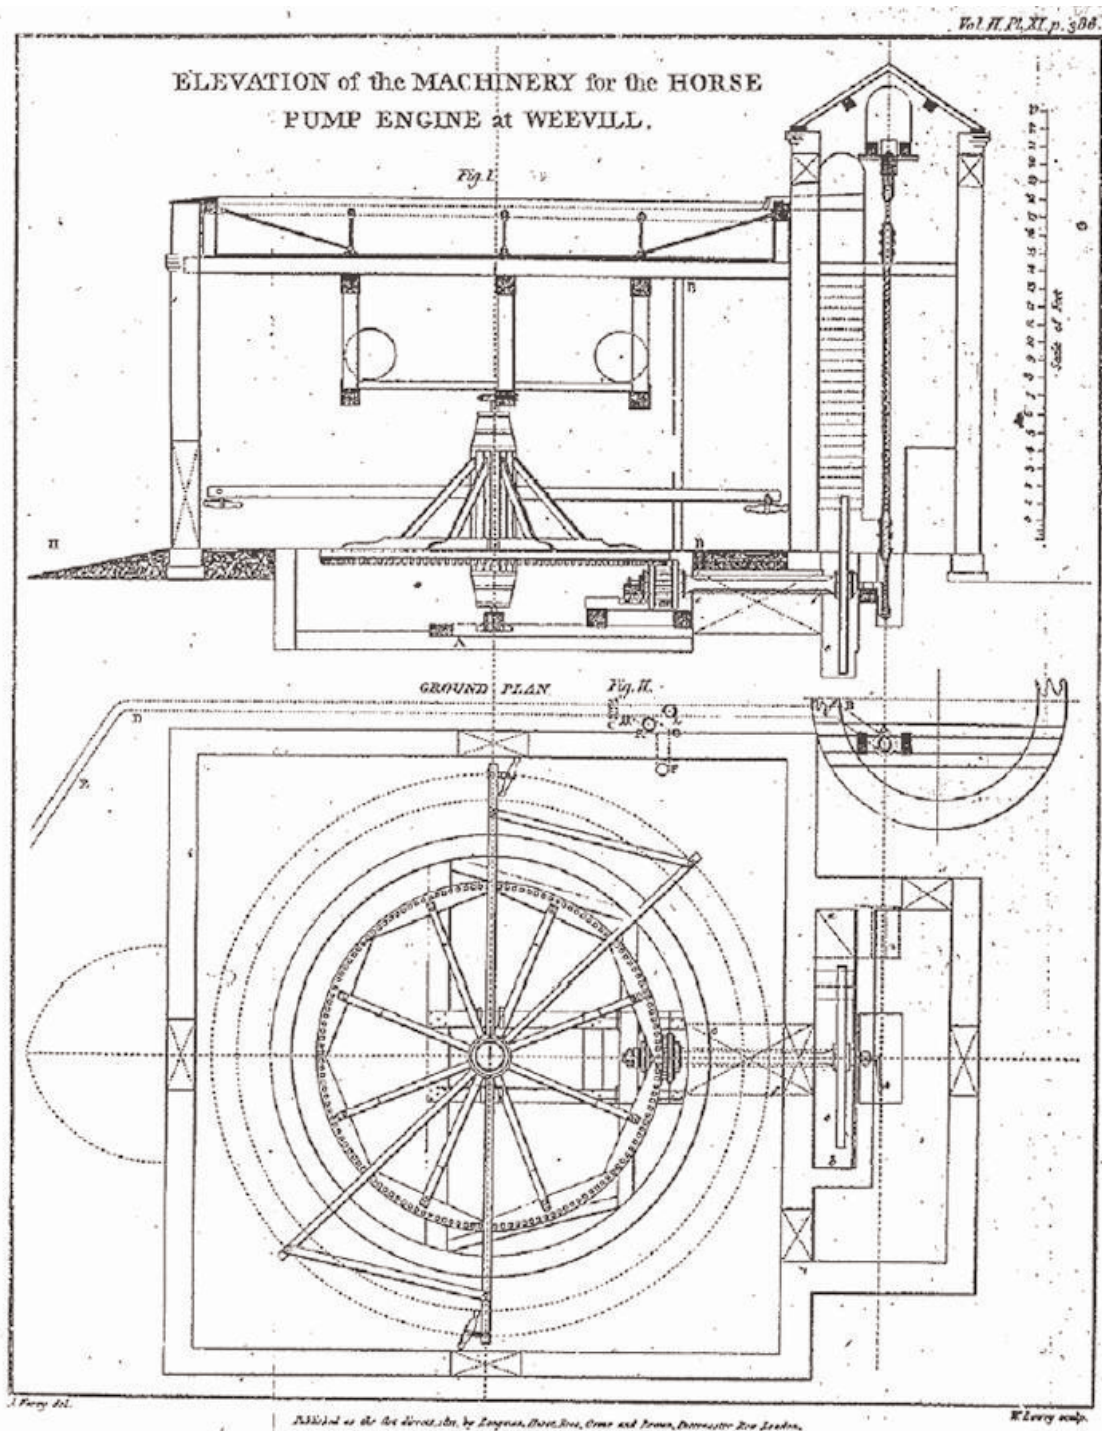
1780 Plan and Cross Section of the John Smeaton Pumphouse. The plans were used again in 1788 to construct the second horse engine pumphouse behind the Samuel Wyatt brewery
